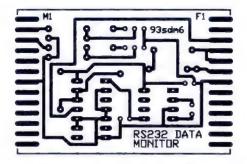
(above): The PCB pattern for the adaptor, shown actual size for those that like to etch their own boards.
